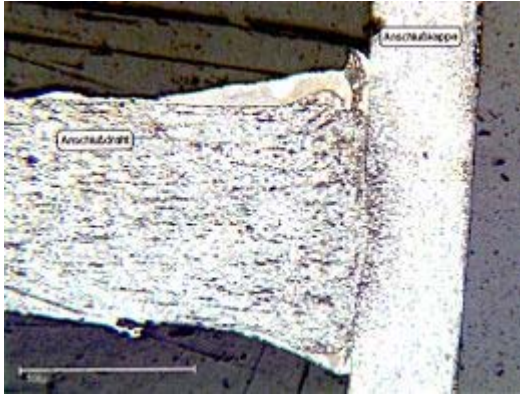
Cross Section FeNiCuSn 30, \varnothing 0.8mm; Poor Weld between Lead and Cap, Force Fe is too low, Welding Temperature too low, Separated Material Zone between Lead and Cap visible
